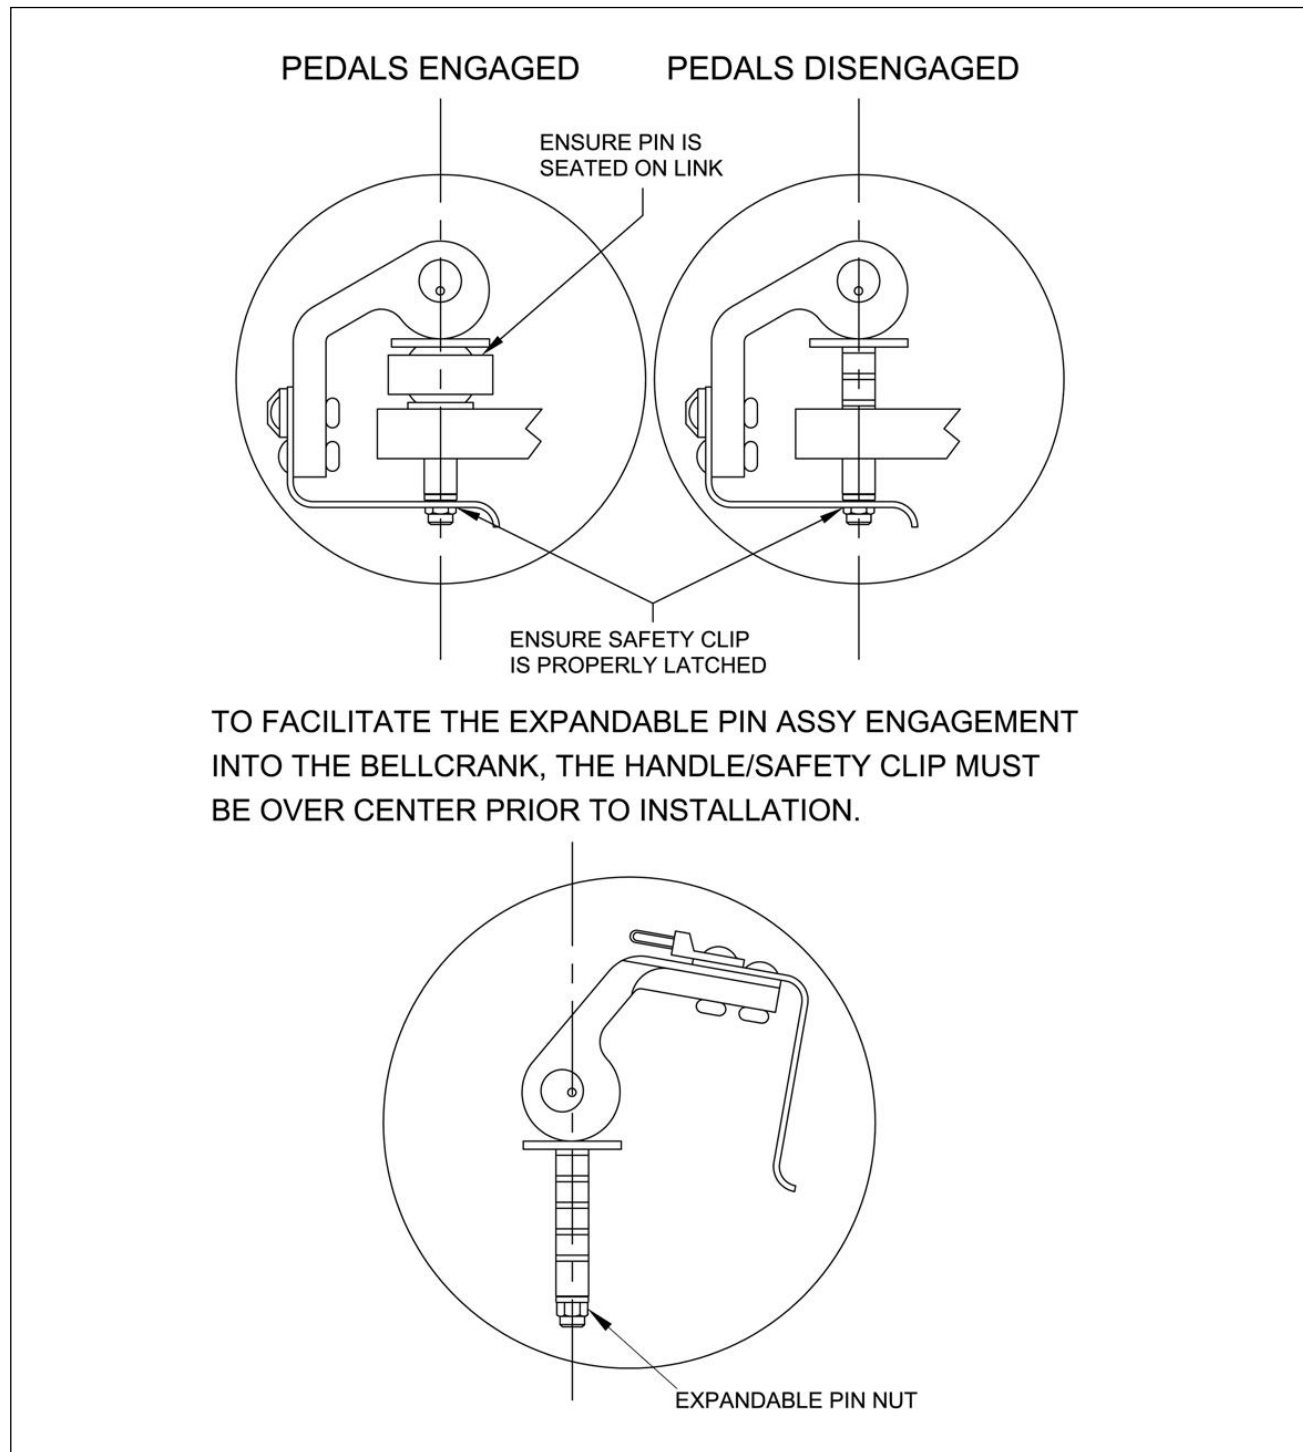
EXPANDABLE PIN ASSEMBLY ENGAGEMENT
